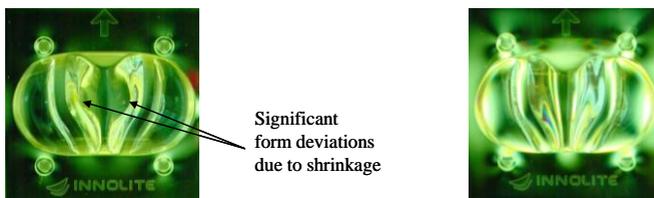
Optics manufactured with conventional injection molding process (left), optics manufactured with local injection compression molding process (right)
